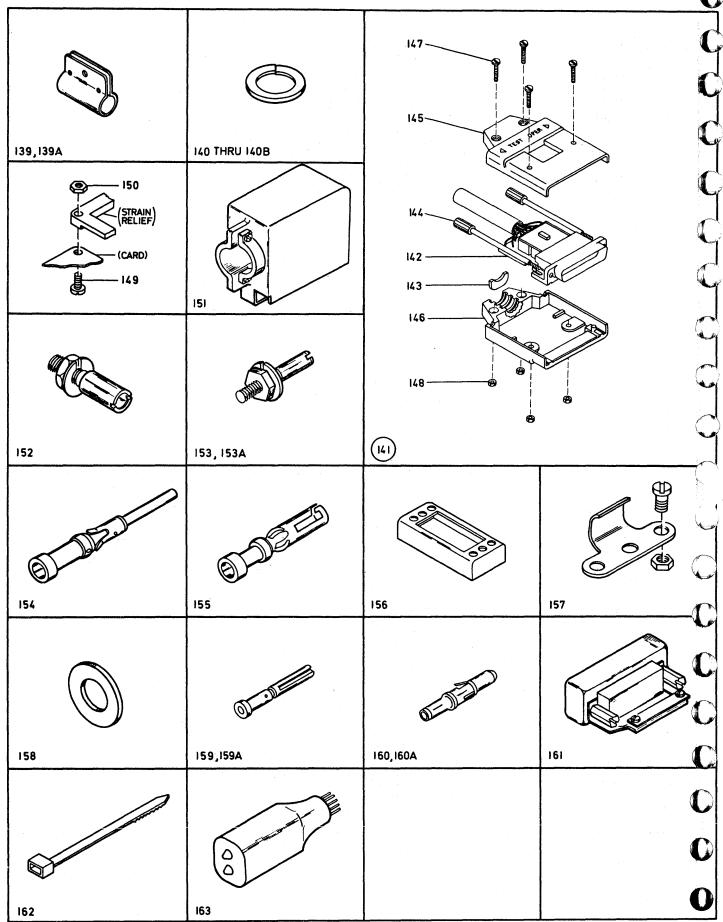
CABLE ASSEMBLIES WITH COMPONENT PARTS (SHEET 6 OF 6, INDEX NO. 139 THRU 163)
